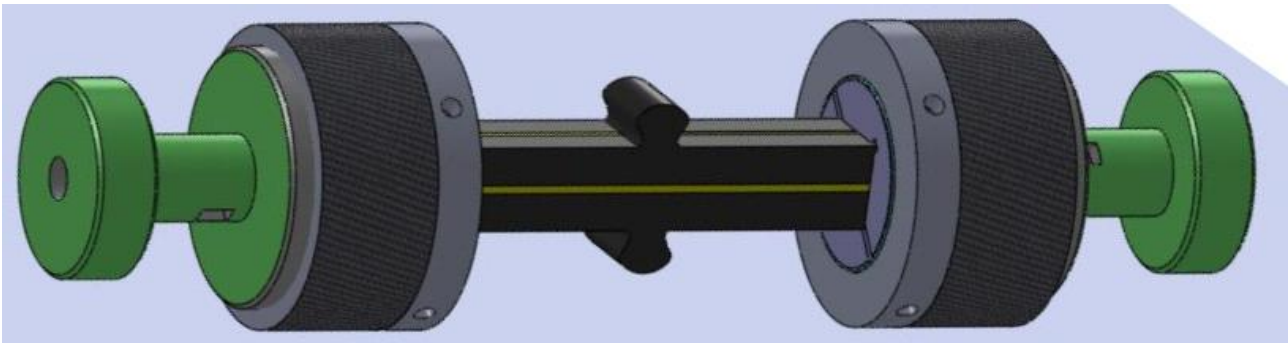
Grip of a rectangular-shaped sample taken from a butt-welded pipe, for testing.
